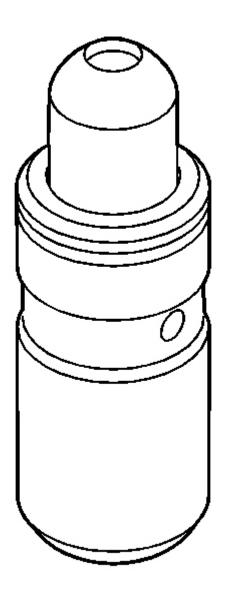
View Of Valve Lash Adjuster Courtesy of GENERAL MOTORS CORP.
